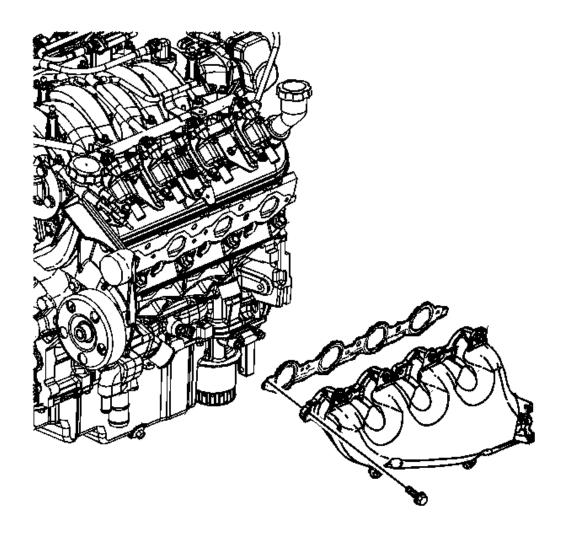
Exhaust Manifold Courtesy of GENERAL MOTORS CORP.
